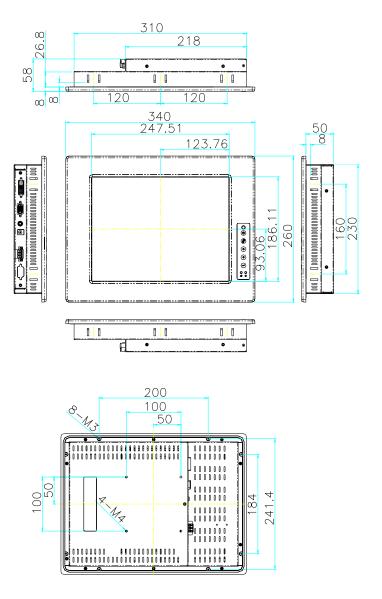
SRM-121 Physical Dimensions (millimeters)
